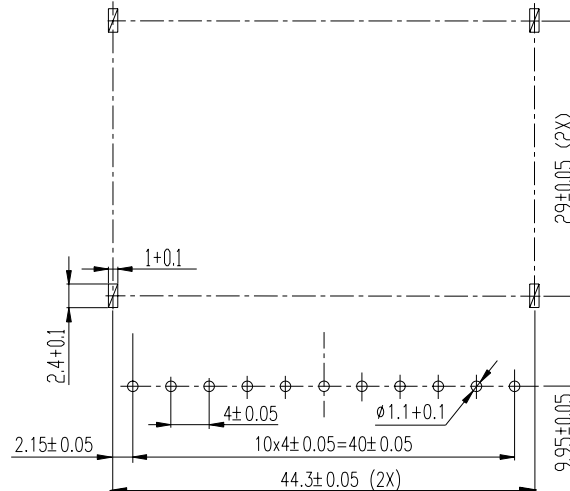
Punching pattern seen from solder side. Horizontal mounting
